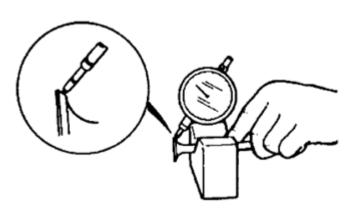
Measuring Valve Head Radial Runout Courtesy of SUZUKI OF AMERICA CORP.
